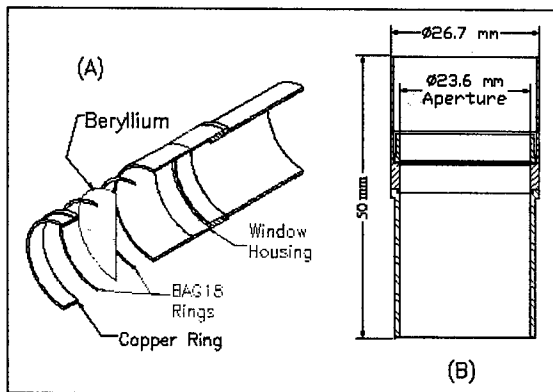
Vacuum braze of the beryllium window (a)Braze arrangement, (b)Finished window assembly
